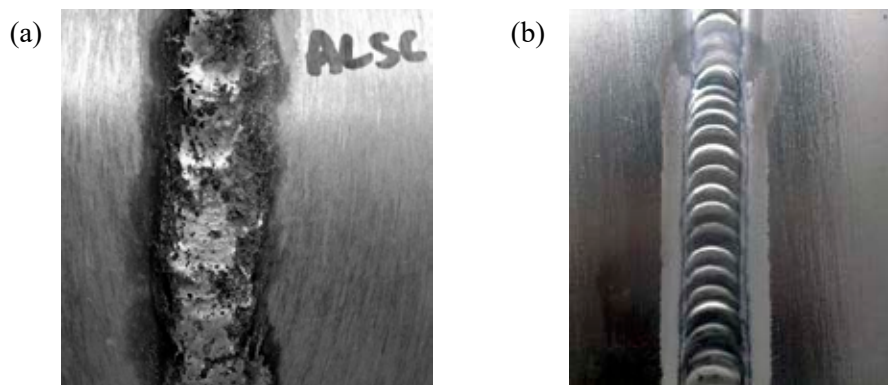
View of the weld face: (a) weld composites AlSi9/SiC/20(p) filling material AlMg5Sc0.61 and (b) alloy 6061 filling material ER5356
